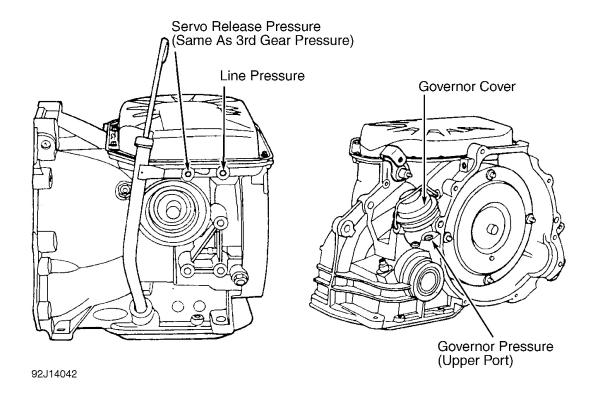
Identifying Line Pressure Test Port Courtesy of FORD MOTOR CO.
